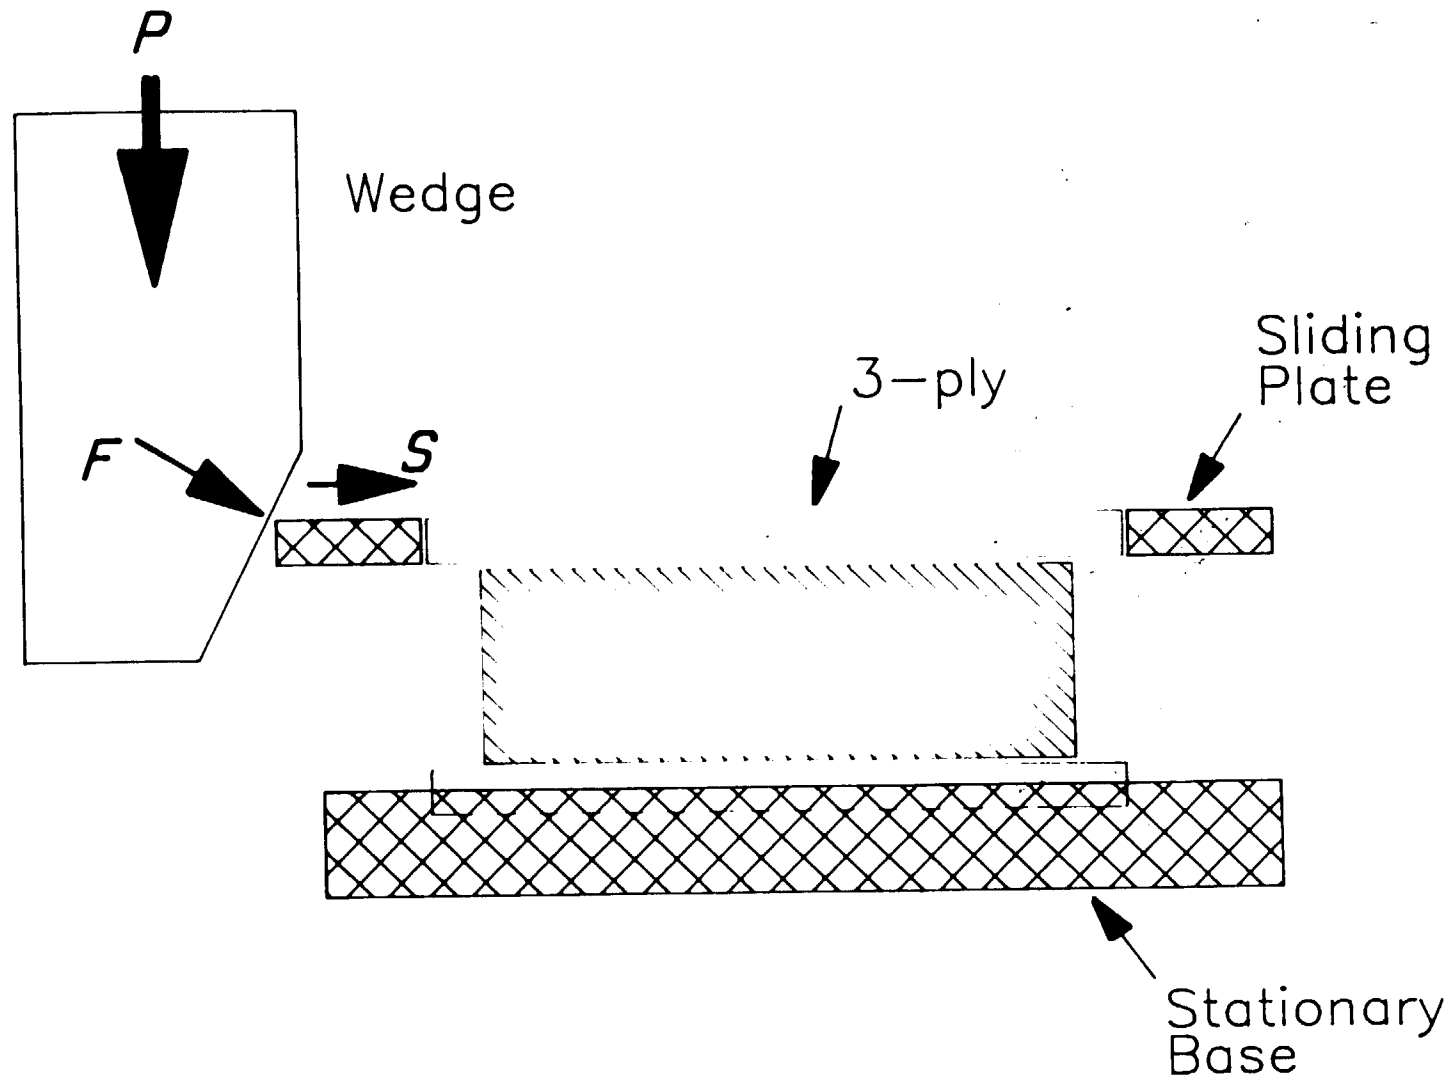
is a sketch of the old fixture design. Ideally this fixture transfers a vertical force (P) into a horizontal force (S) with a wedge pin and sliding plate. There is some clearance between the machined surfaces, allowing the sliding plate to rotate, and the sliding plate will impart a moment to the 3-ply.
